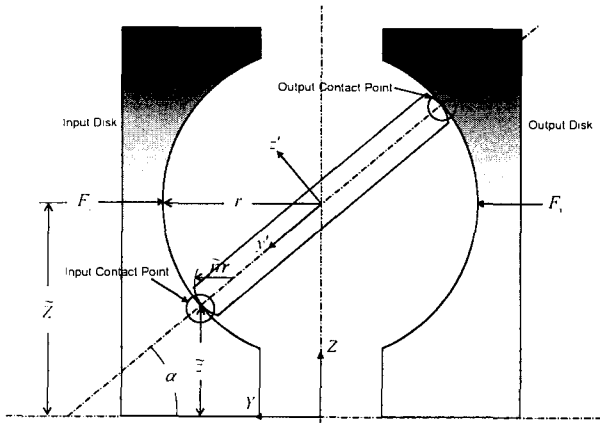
Geometry of Crowned Roller and Toroidal Surfaces
